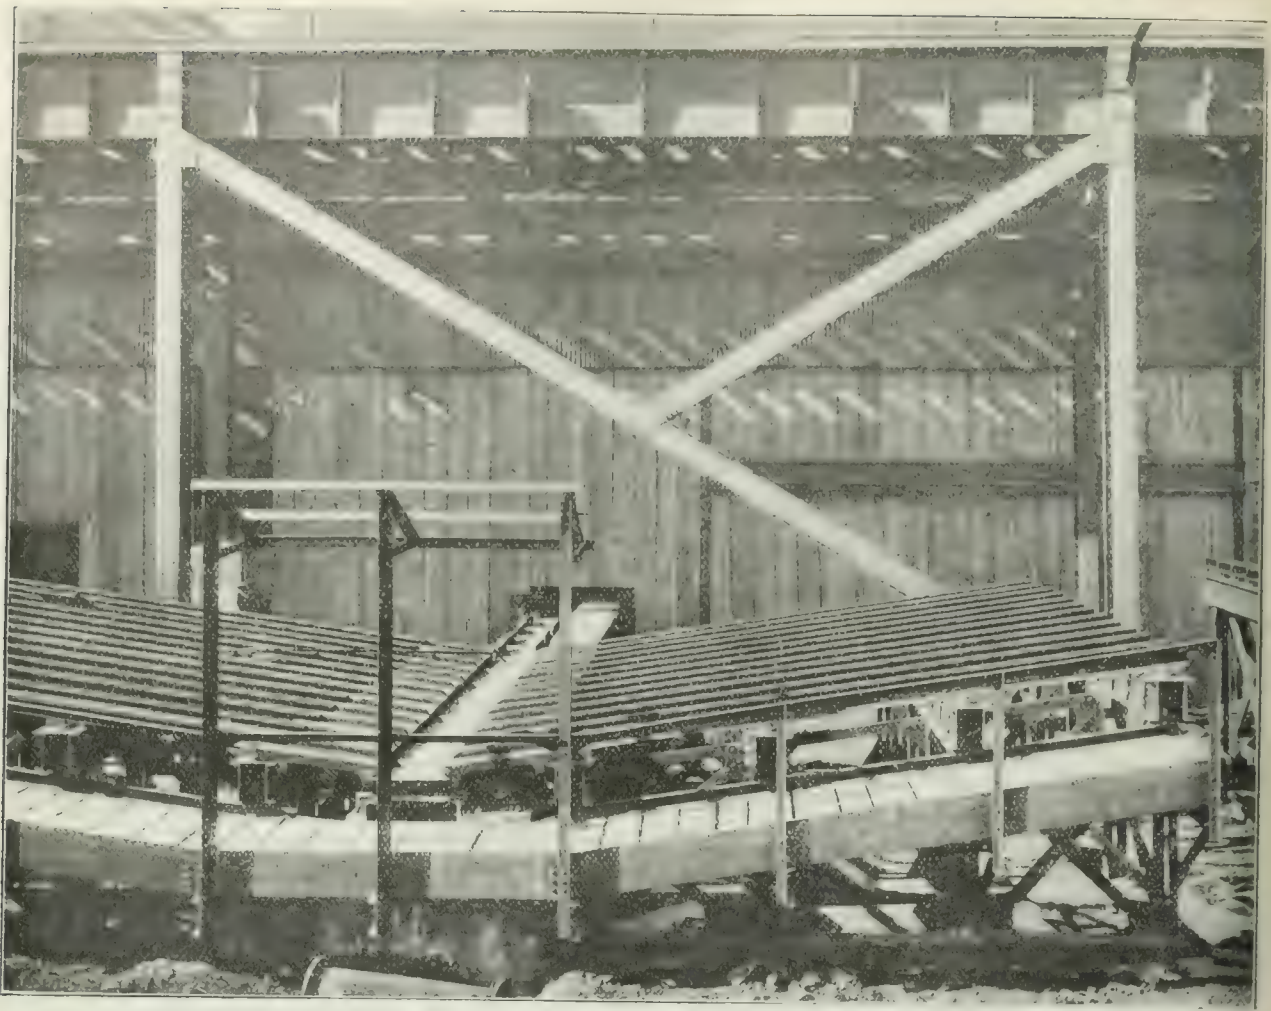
Yard Skids on Which Billets Are Pushed Down for Conveying to Heating Furnaces of 12-In. Merchant Mill No. 1. Similar Double Skids Are Provided for 12-In. Mill No. 2.
